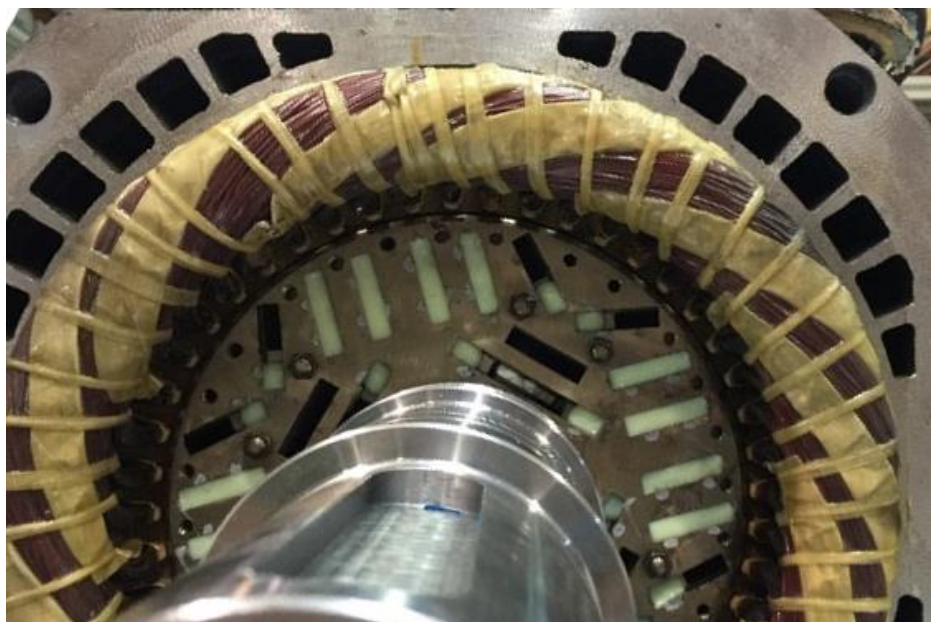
PMSynRM prototype rotor assembled inside the HDP series 250 frame size stator.
